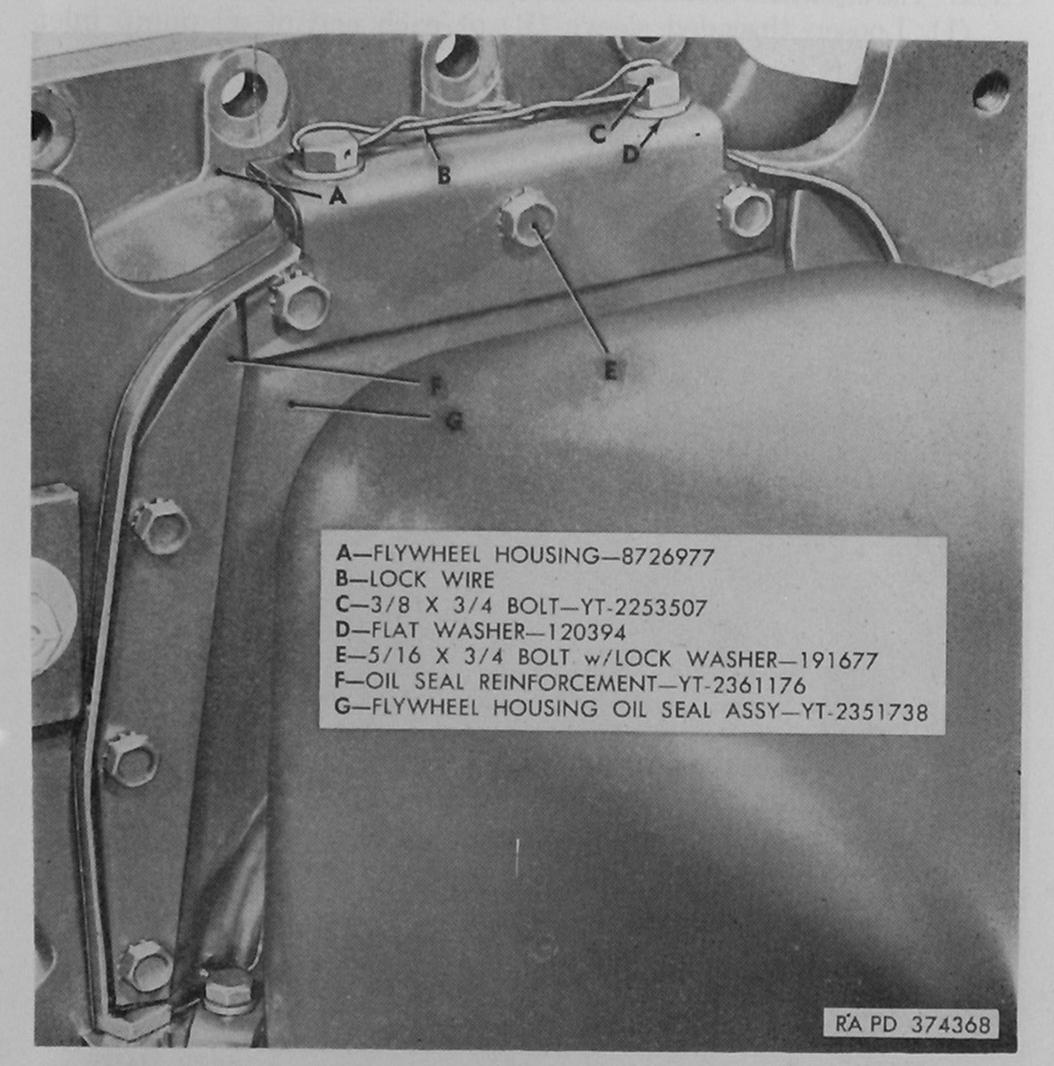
Flywheel housing oil seal assembly installed—engine assembly 8726920.
